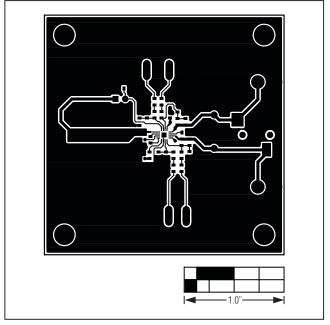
MAX97220A EV Kit PCB Layout—Component Side
